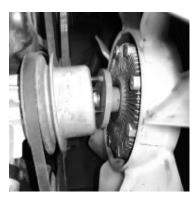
Take off the fan/clutch assembly by removing the 4 10-mm nuts. Pull assembly out.
